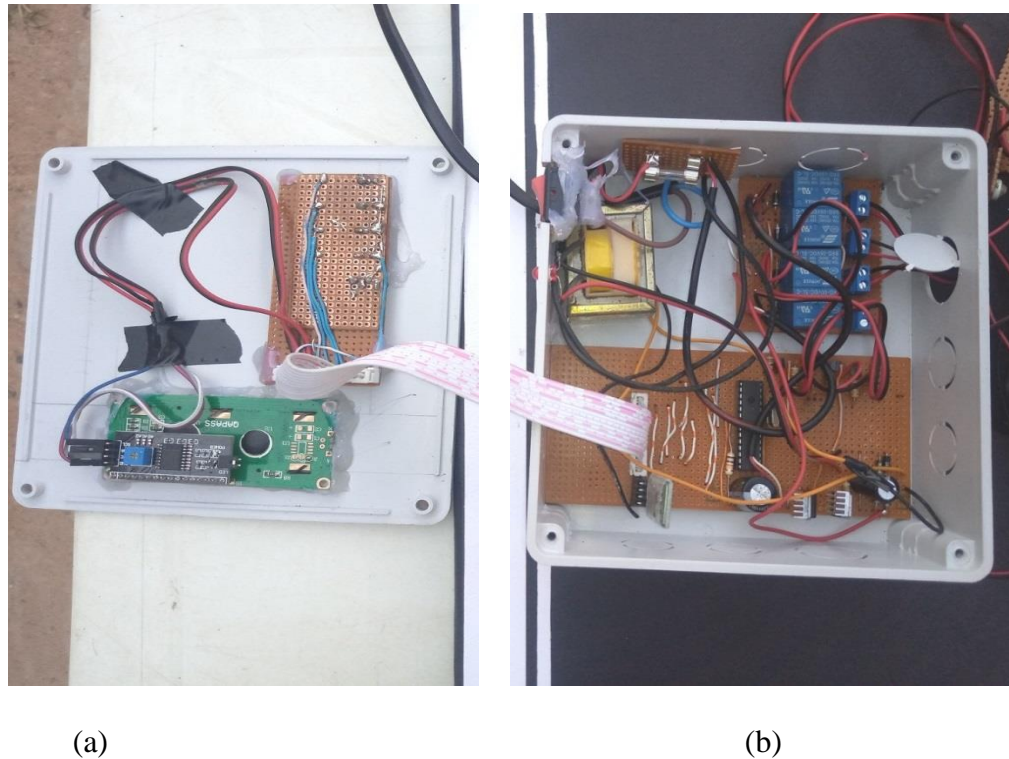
Component on finished circuit board: (a) Display and (b) Main circuit
